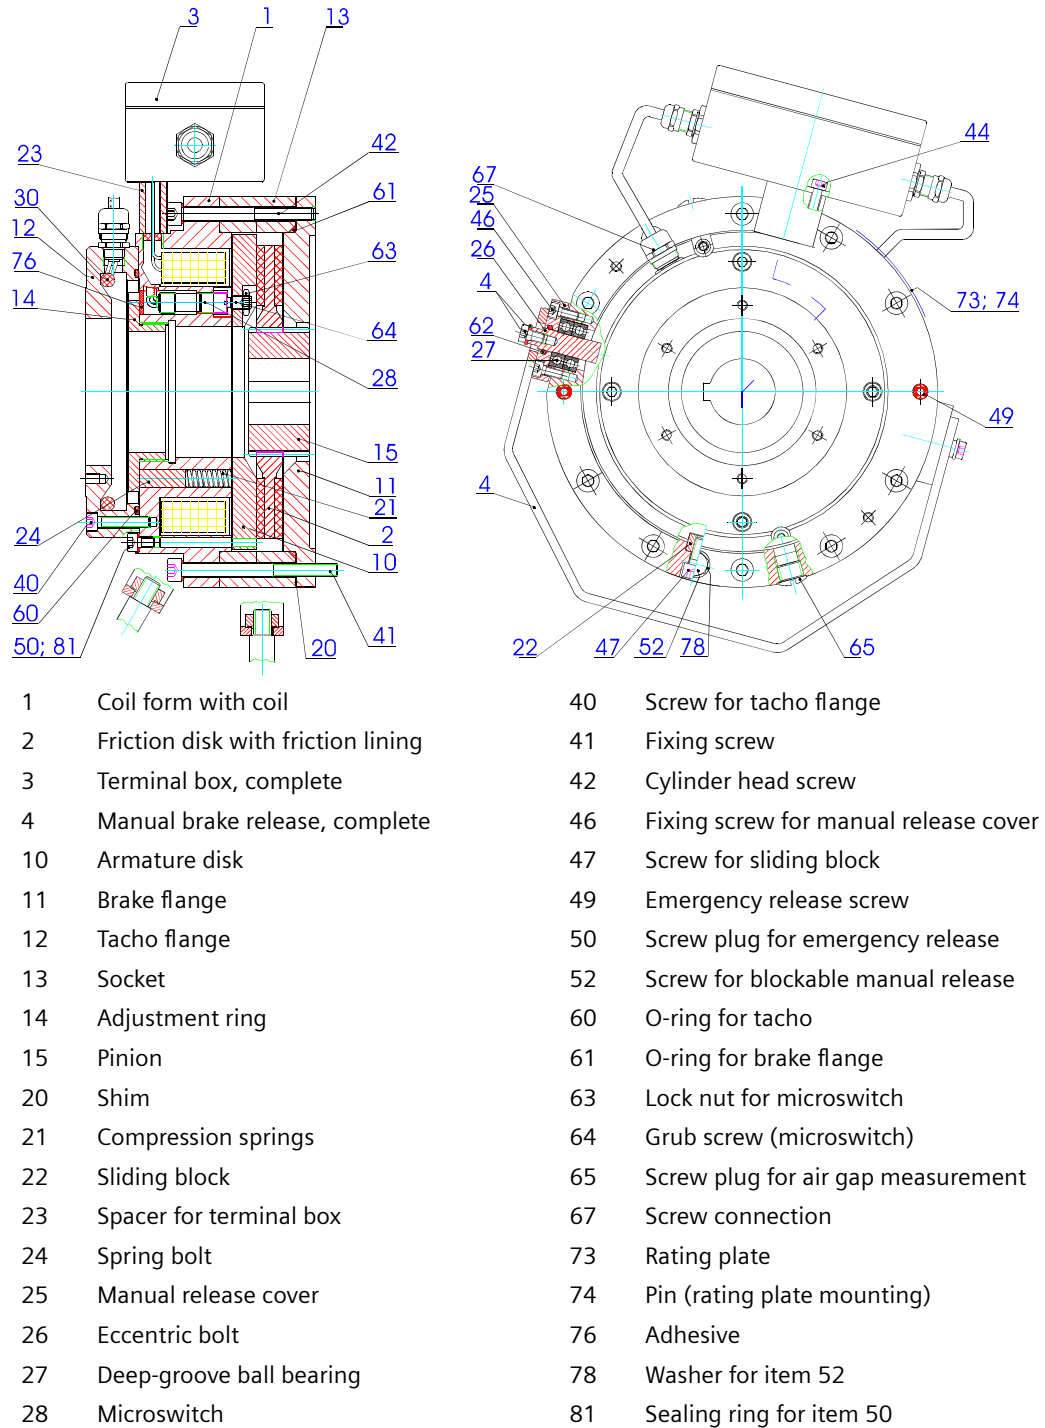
Mounting of holding brake SH 180 and SH 225
